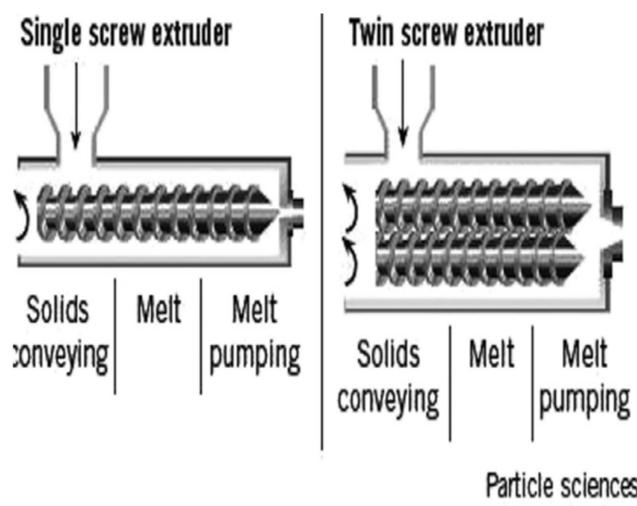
A cross section of single screw (left) and twin screw (right) extruder barrels.
